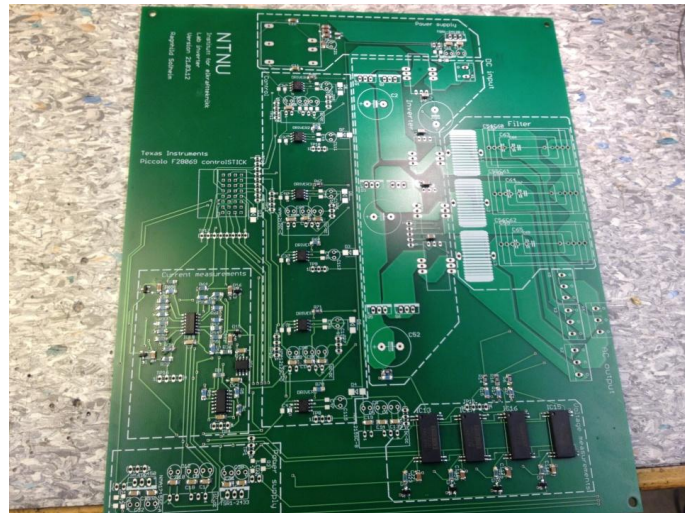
THE PCB WITH THE SURFACE MOUNTED COMPONENTS
